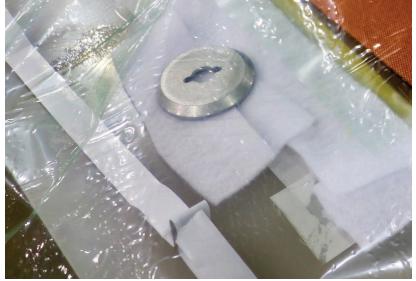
The vacuum valve base is placed over the bleeder away from the wet resin area. After the vacuum bagging film is stuck down to the sealant tape, make a small cut in the bagging film over the valve base, and connect the top of the valve to the base, making an airtight seal but allowing air to exit through the valve.
